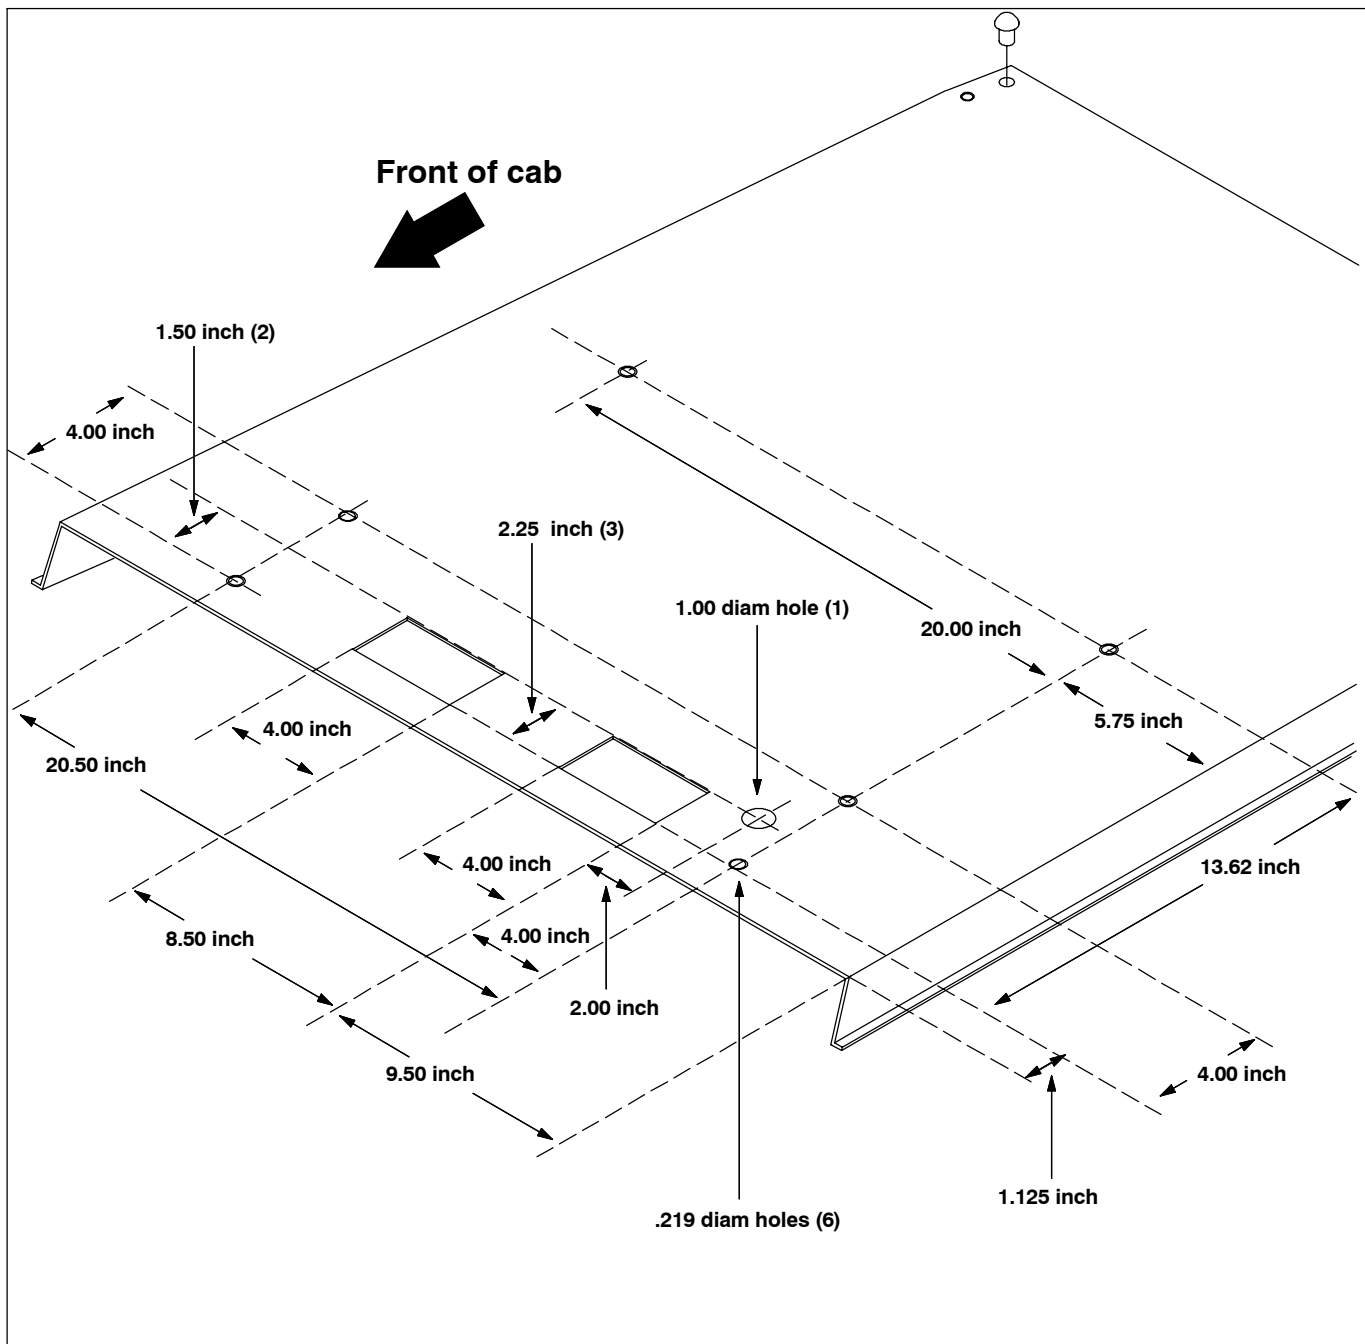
Rework Dimensions For Cab Roof (earlier version of cab)
